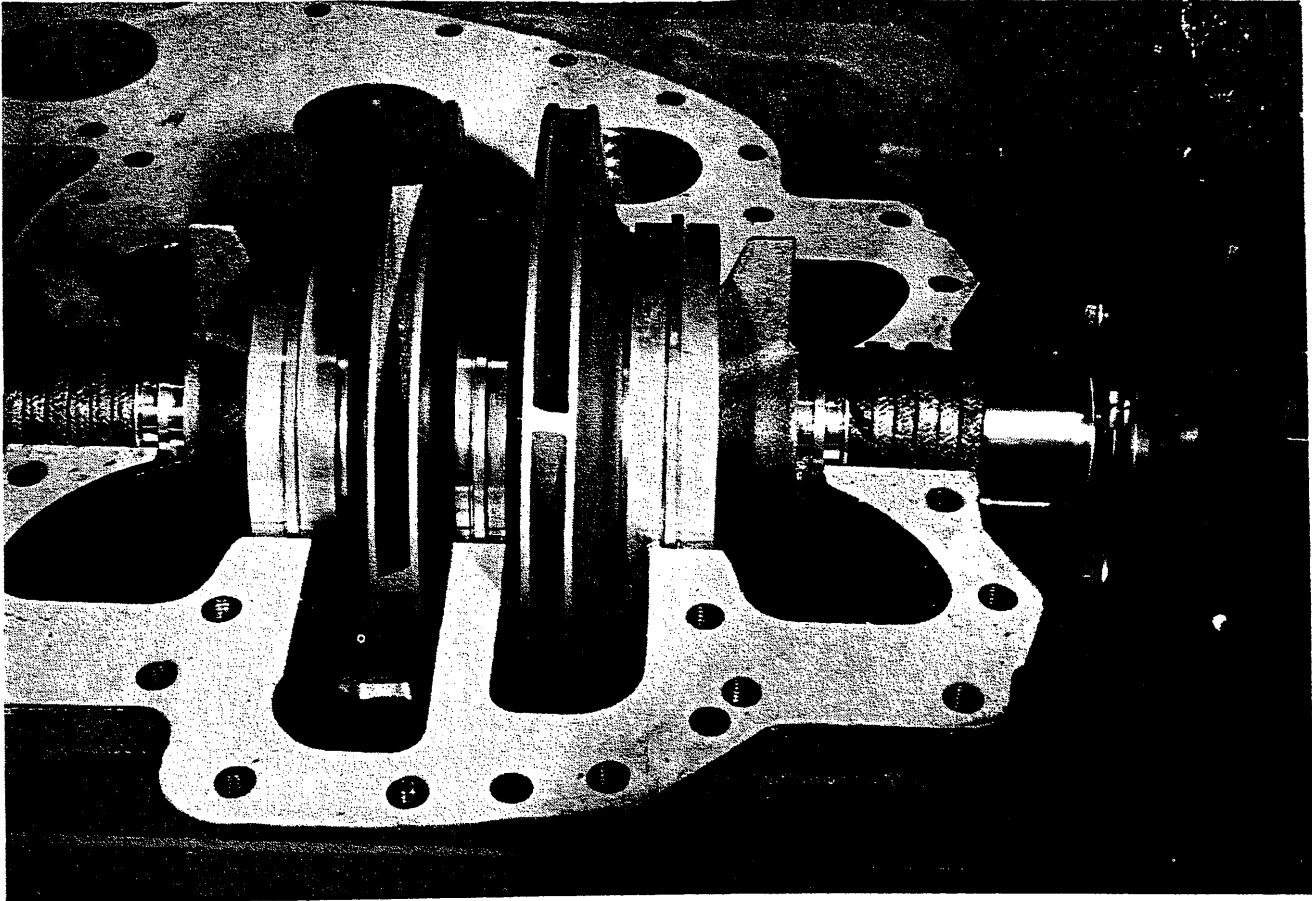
Wear Ring and Stuffing Box End Installed in Volute Body
